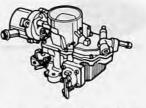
Disconnecting choke linkage from auto-choke assembly
